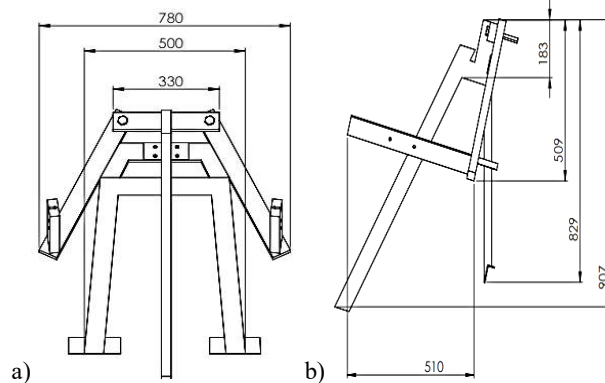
Sketch of multi station training tool for lateral bench press exercises, a) front view and b) side view
